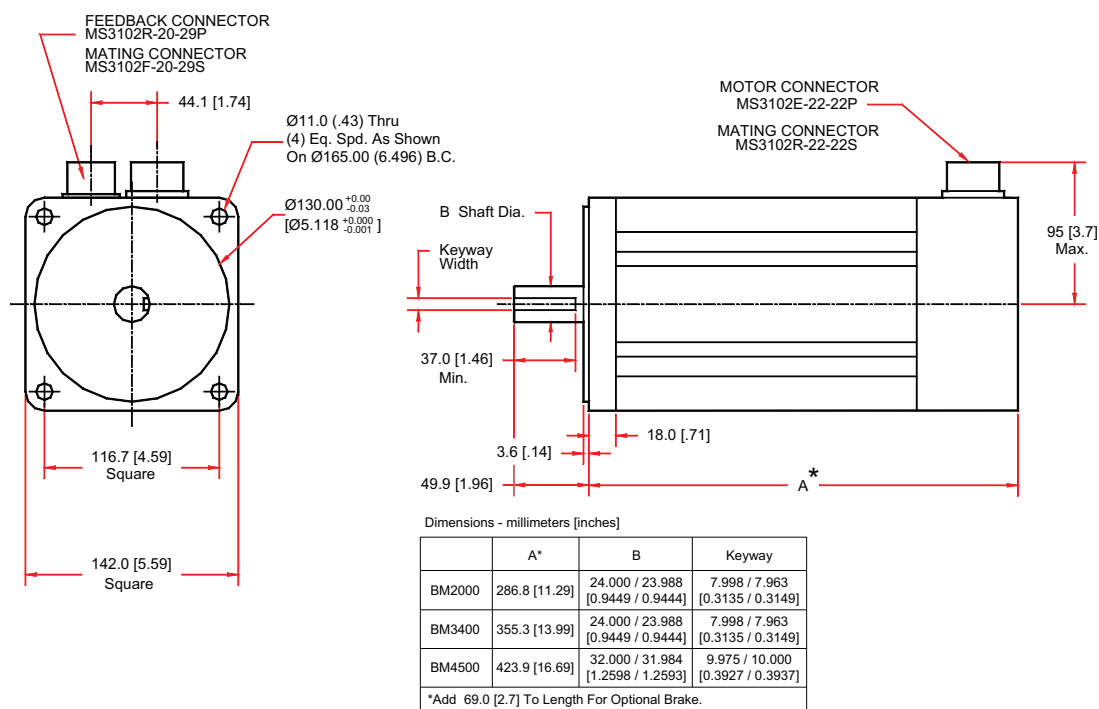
BM2000, BM3400, BM4500 Model Dimensions (IEC 142)
